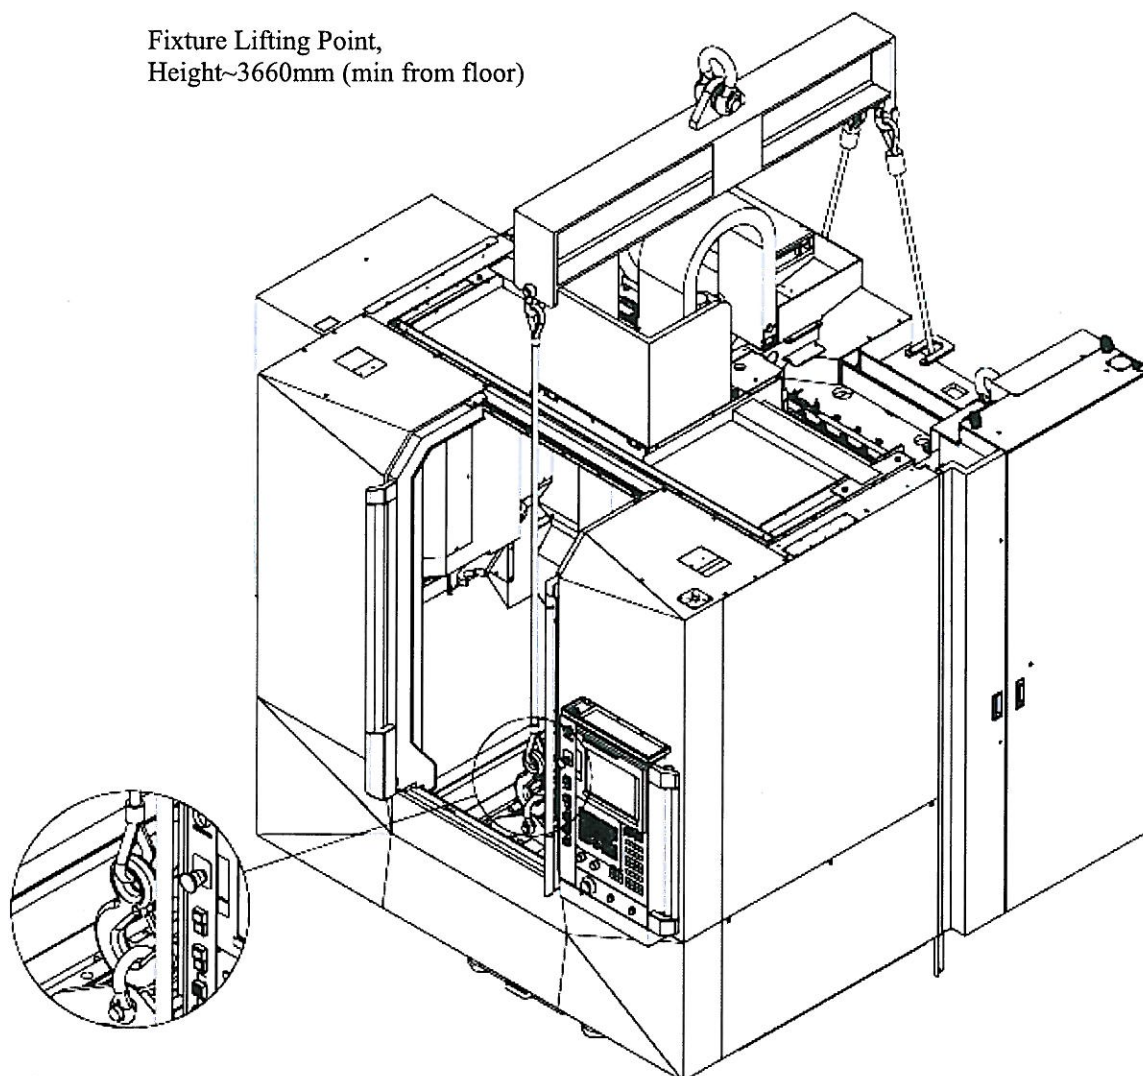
F3/F5 Machine Lifting (Front)
